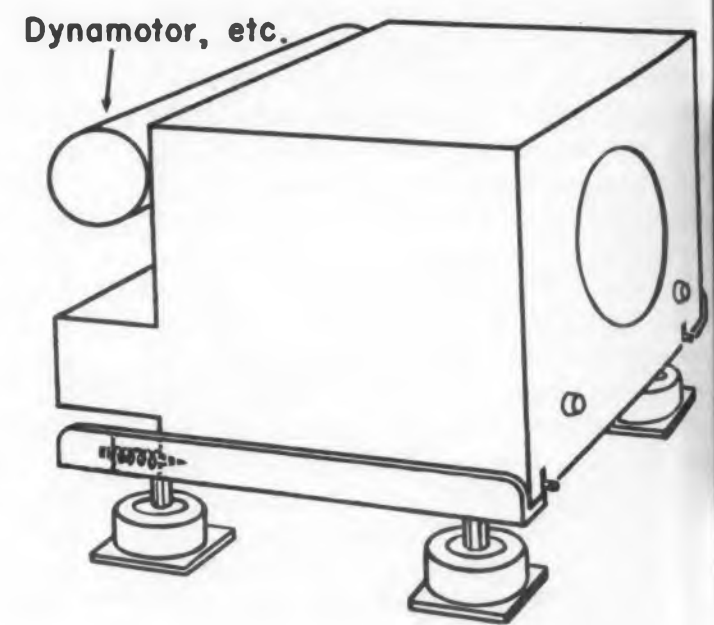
Alternative design to that shown in Fig. 2, showing how different types of components can be mounted outside the dust cover to save space.
